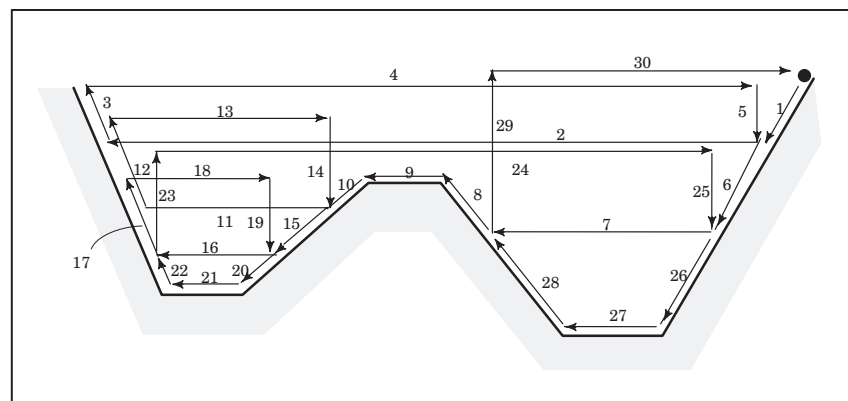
(f) Cutting Path in Stock Removal in Facing
